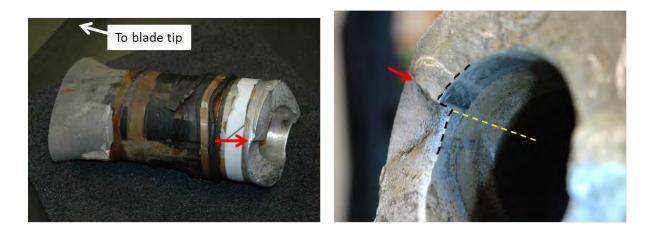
Taper and Bushing Bore Surfaces Annotated
